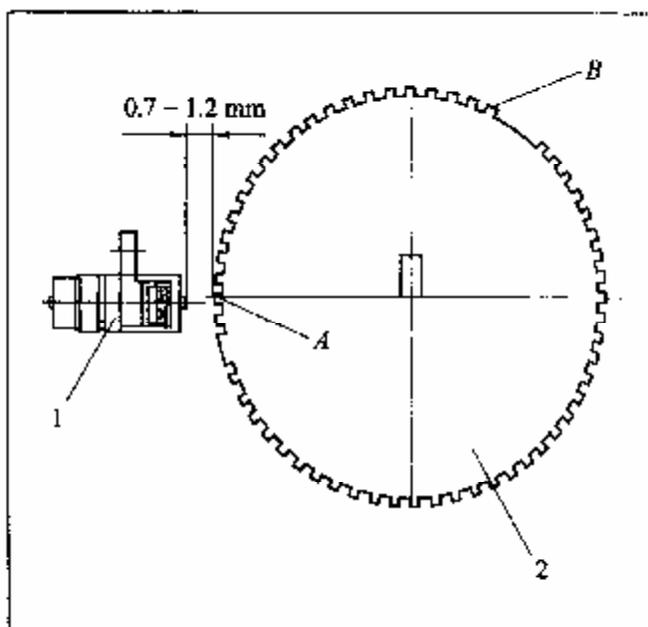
Installation Position of Crankshaft Position Sensor and Crankshaft Pulley
